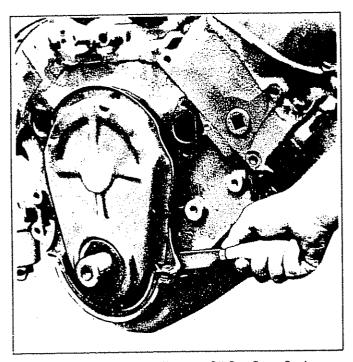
A2-38--Cutting Tabs on Oil Pan Front Seal
